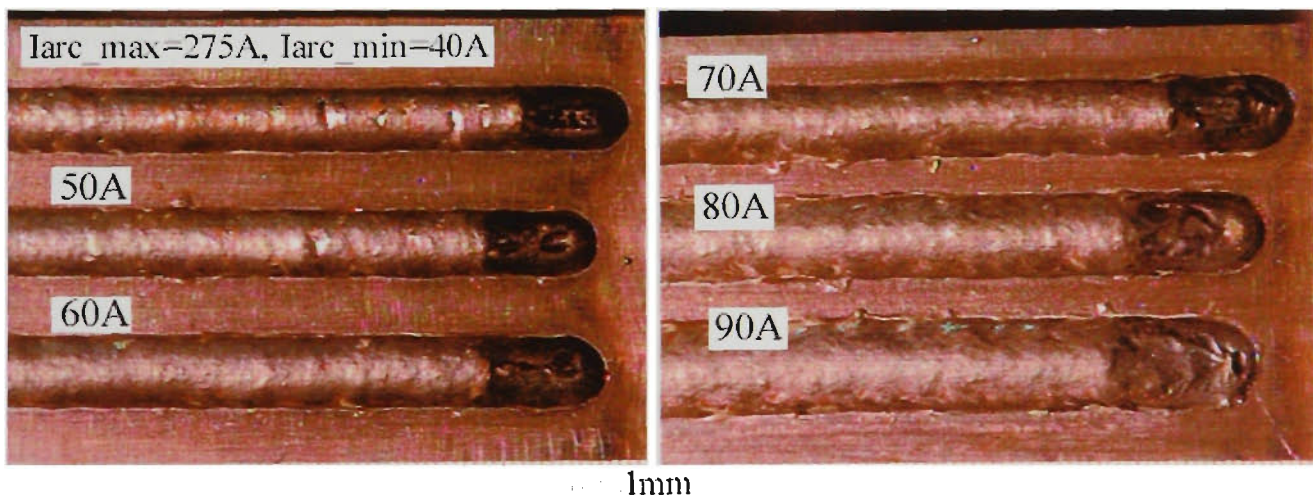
Photograph of weld beads for CO₂, CTWD=12mm
